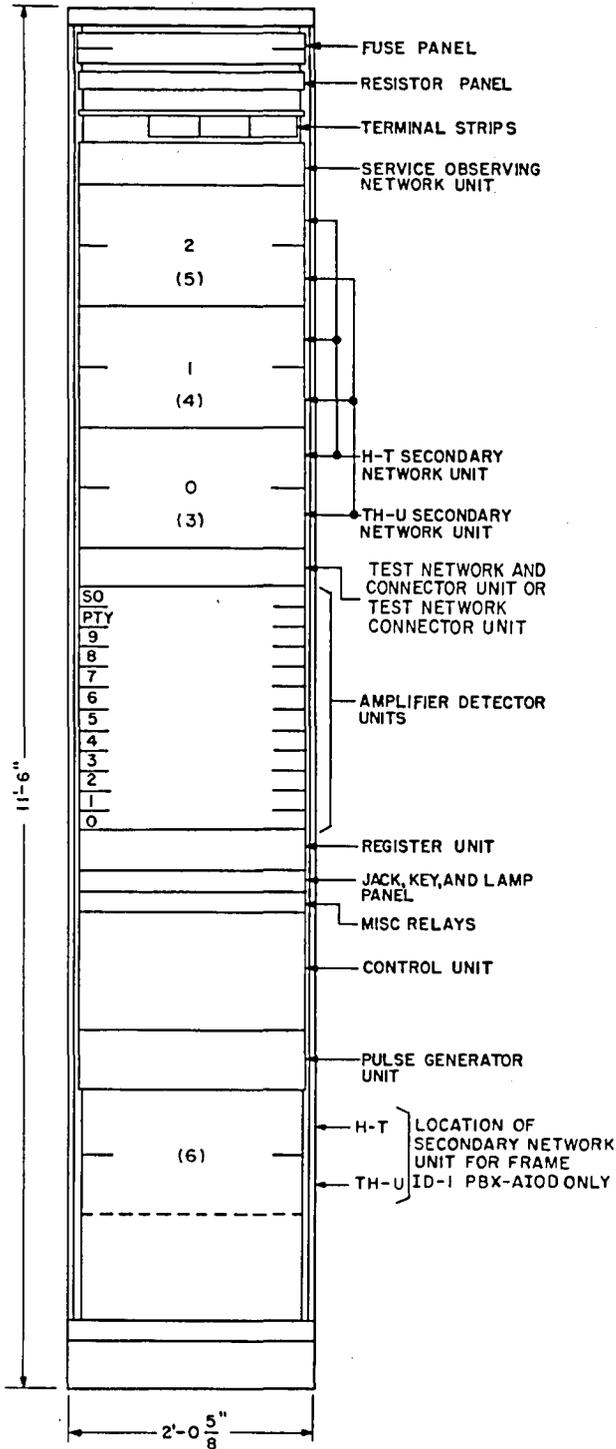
Identifier Frame 0 and 1—Typical 11 Feet 6 Inches High
